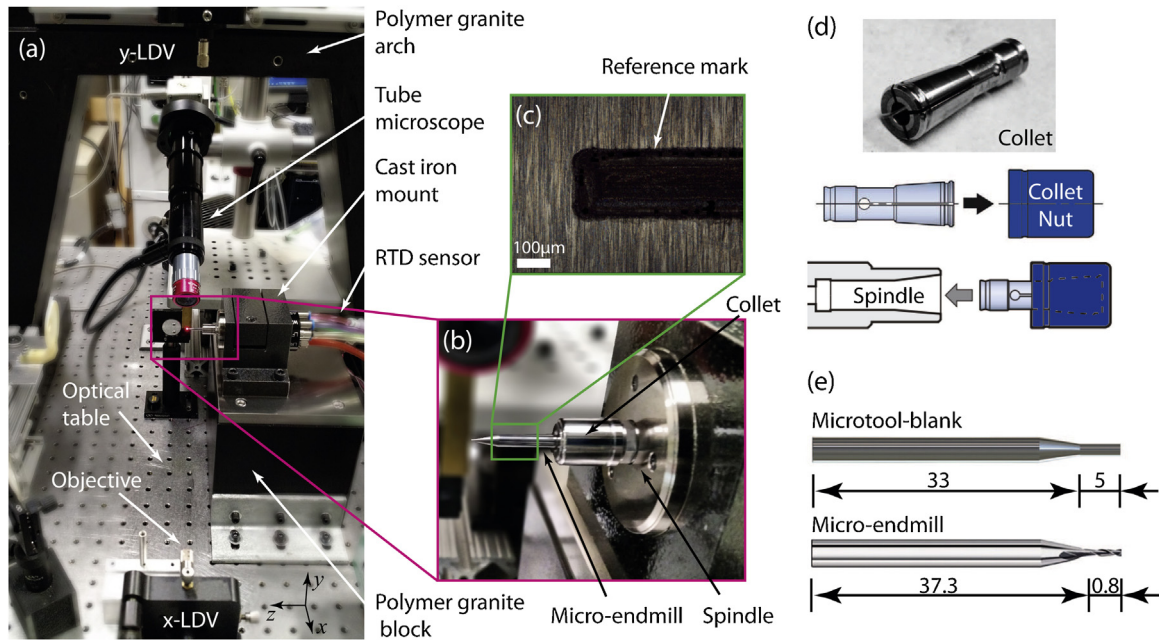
(a) The experimental setup used for the measurement of radial throw, (b) a micro-endmill attached to the spindle, (c) the reference mark on the tool, (d) a four-jaw collet and clamping of collet using a collet nut, and (e) the microtool-blank and the micro-end mill used in this work (dimensions not to scale.)
